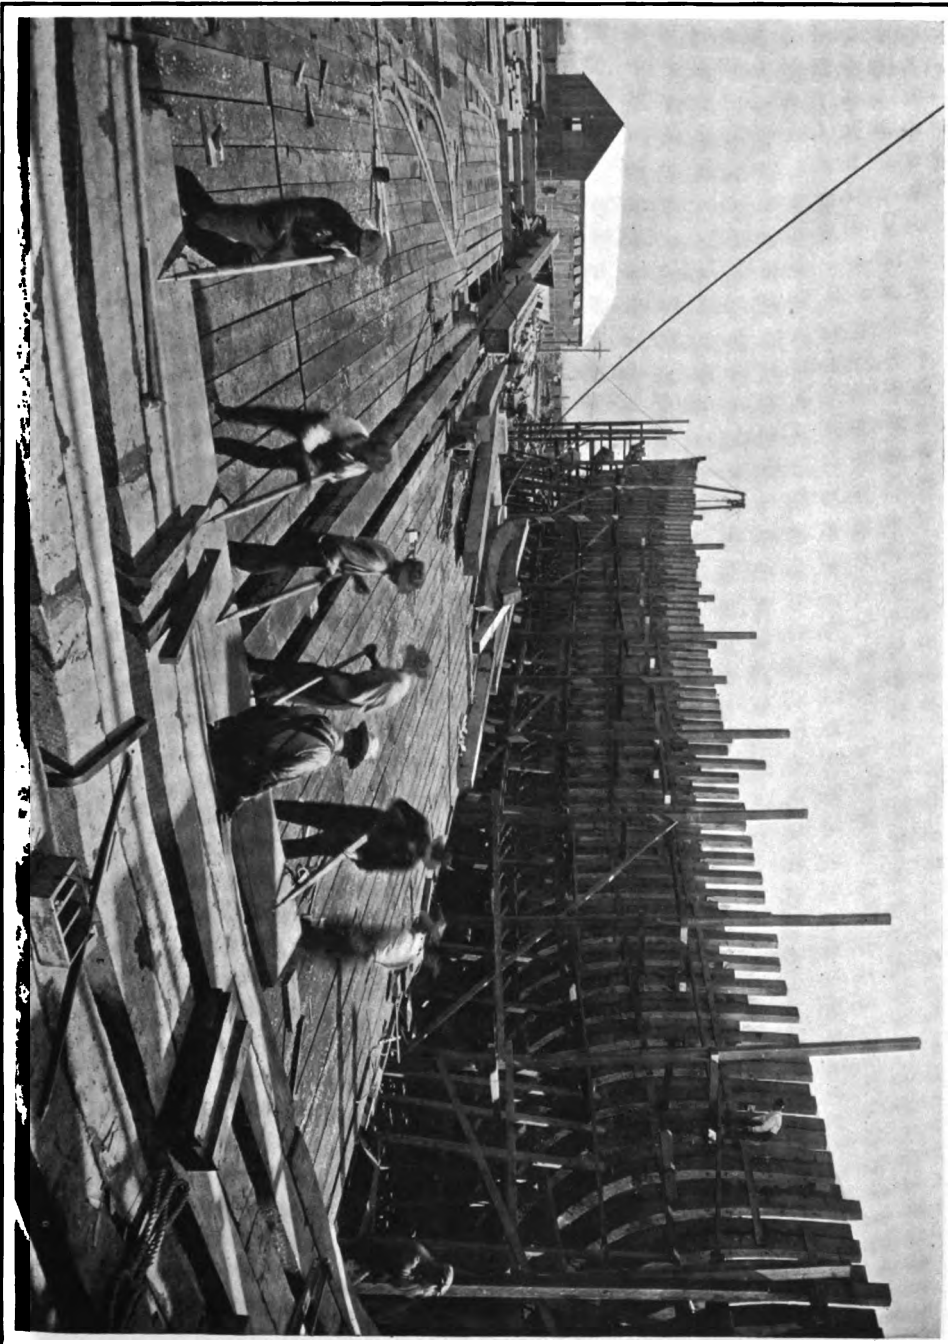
GETTING A FRAME INTO PLACE BEFORE THE CRANE WAS IN USE
